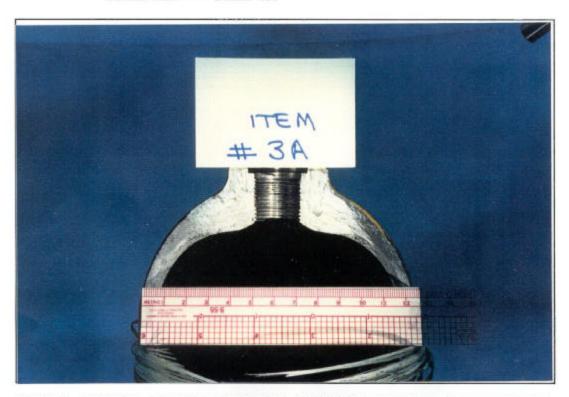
HEAD OF THE RUPTURED CYLINDER SHOWING LOCATION OF CRACKS IN THE SHOULDER OF THE CYLINDER HEAD -- ITEM 3A
